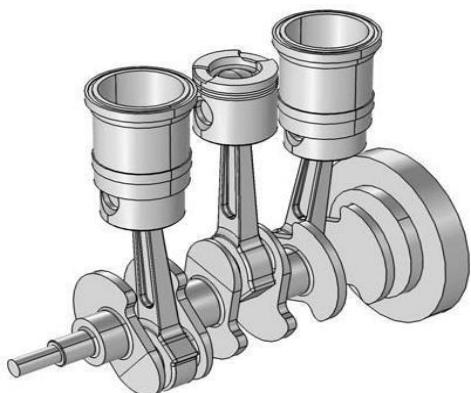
CAD model of a three-cylinder reciprocating engine. Image shows three sets of pistons, cylinders, and connecting rods, one crankshaft, and two bearings. The piston and cylinder are connected using a prismatic joint, while hinge joints connect pistons with connecting-rods, connecting-rod with the crankshaft, and the crankshaft with bearings.
